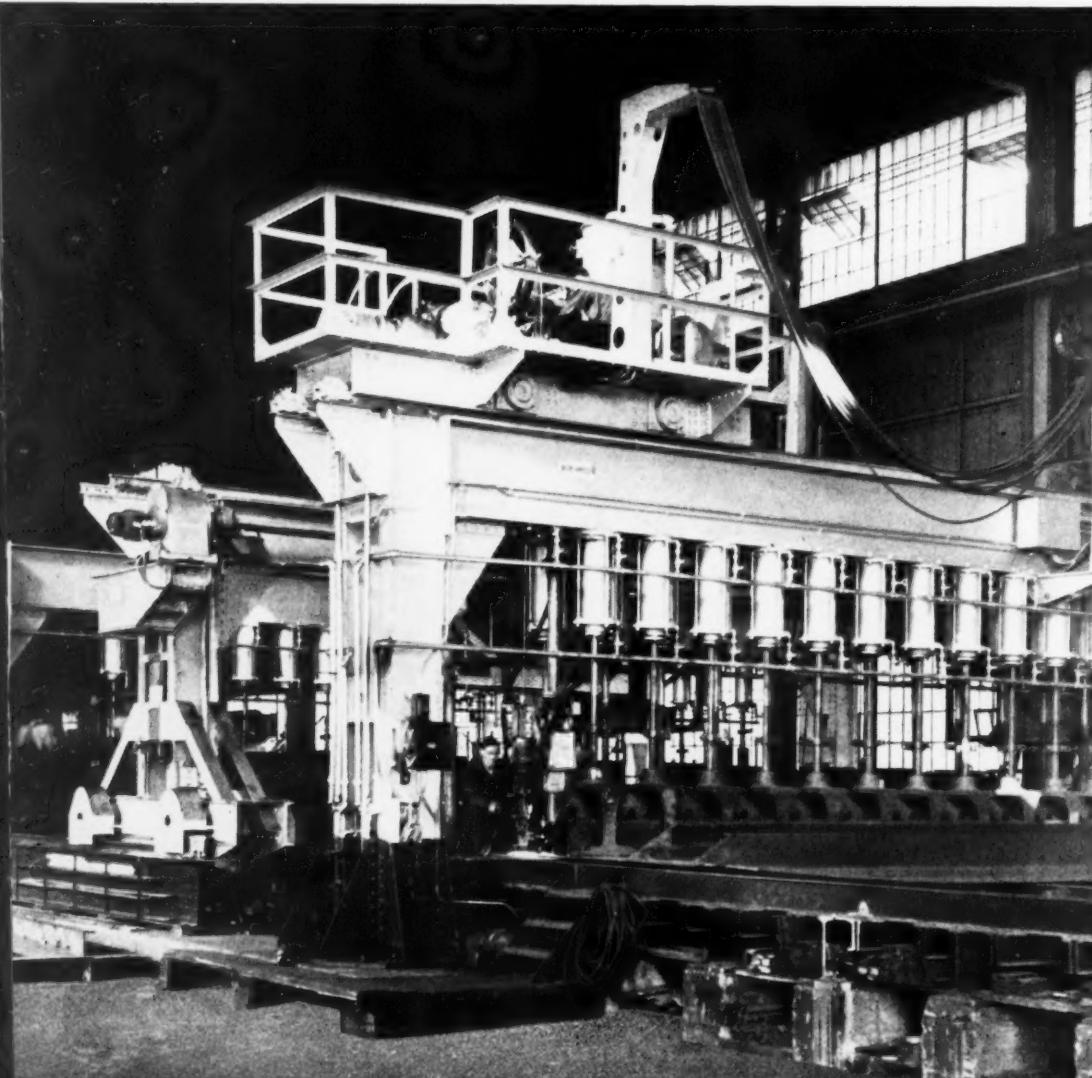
Huge Three-station Machine in the Sun Shipyard, which Automatically Welds Structural Steel Stiffeners to Both Sides of Ship Plates
